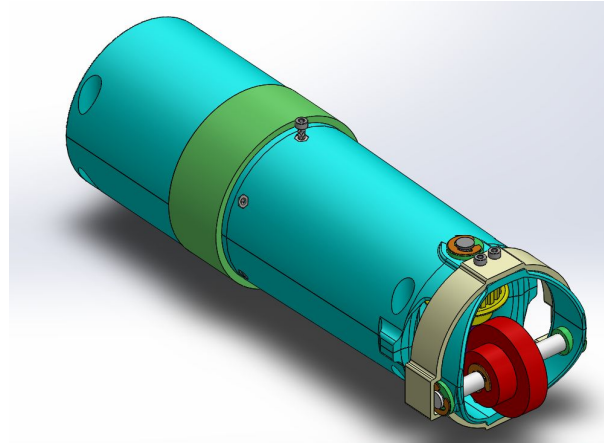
Full overview of CAD model for the final design with the outer casing hidden. This image does not include the Ada Hand, which would be rigidly attached to the shaft holding the worm gear in red.
